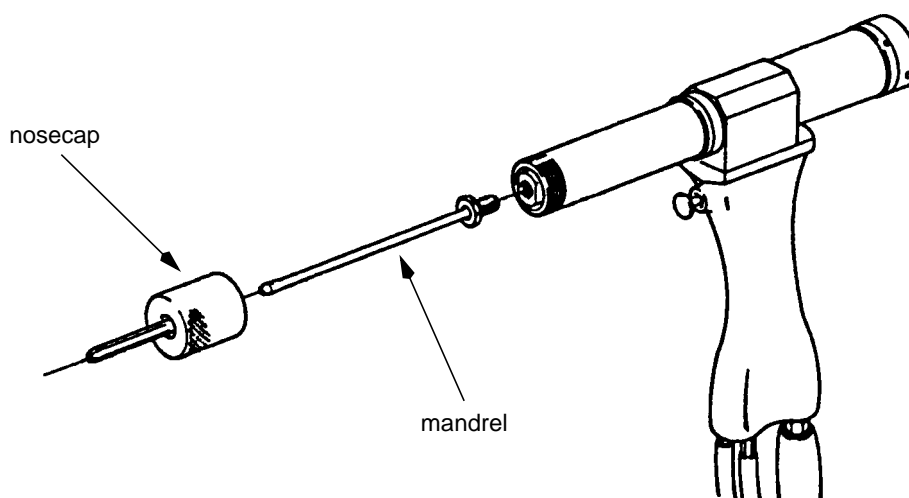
Assembly of Mandrel/Nose Cap to Puller Unit
